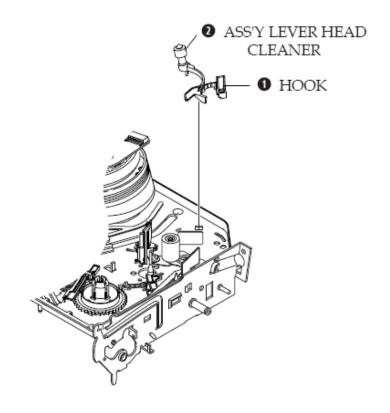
Ass'y Lever Head Cleaner Removal
